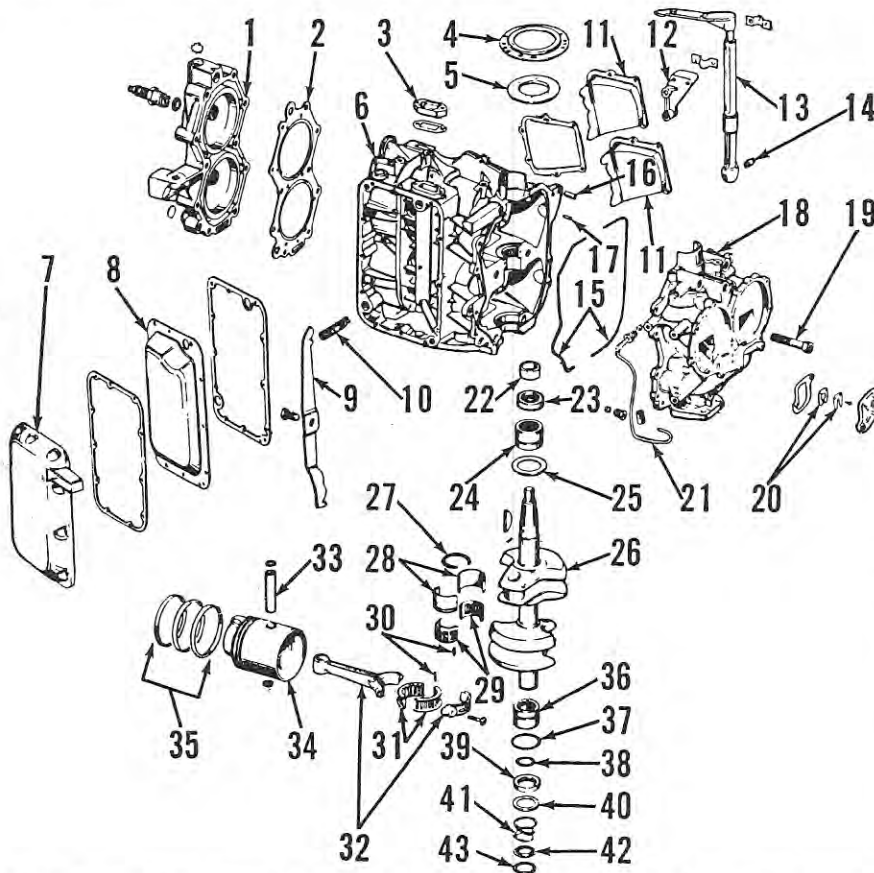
Exploded view of late model 25 horsepower power head assembly. Early 22 and 25 horsepower models are similar.
